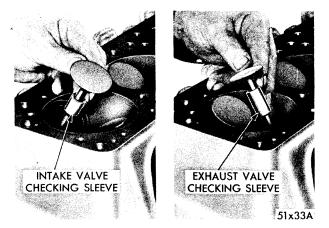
Installing Sleeves to Check Guide Clearance (FirePower) (Typical of SpitFire)
